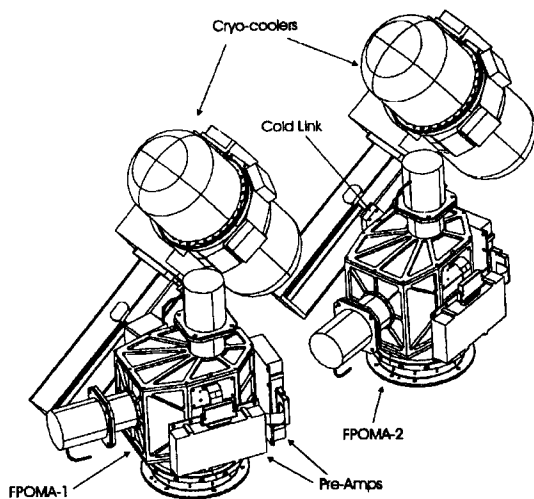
Mechanical pulse-tube coolers with FPOMAs
